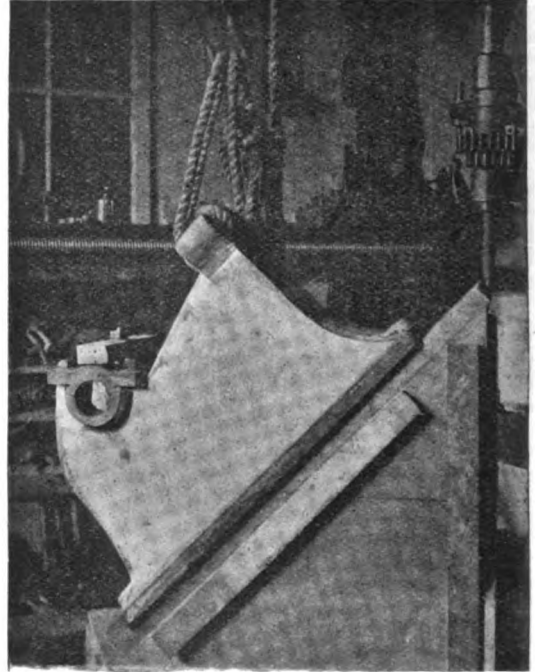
MOUNTING GAS ENGINE BED ON WOODEN STAND FOR DRILLING.
